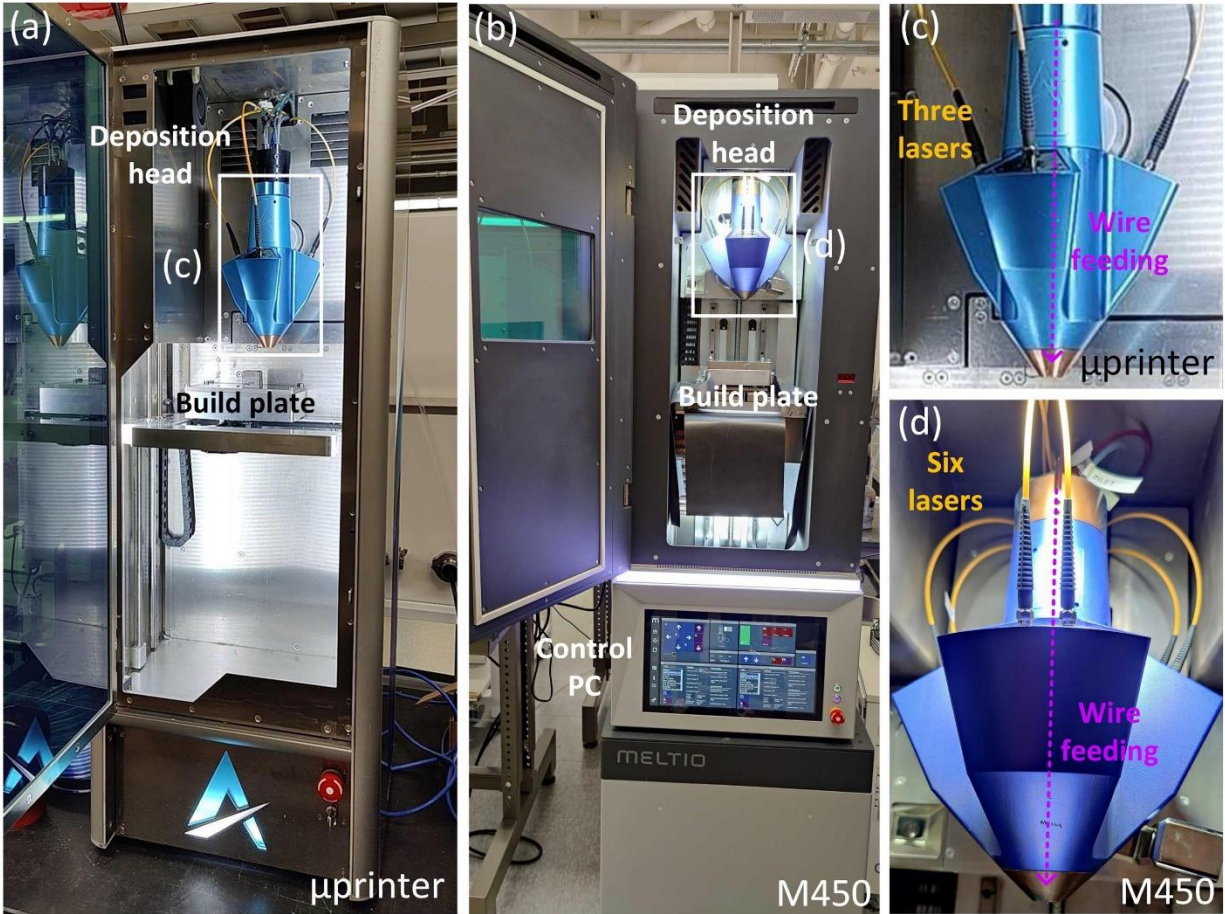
Photographs of the two wire-laser DED systems used in this dissertation. (a) The Additech μ printer and (c) its deposition head equipped with three lasers. (b) The Meltio M450 DED printer and (d) its deposition head equipped with six lasers.
